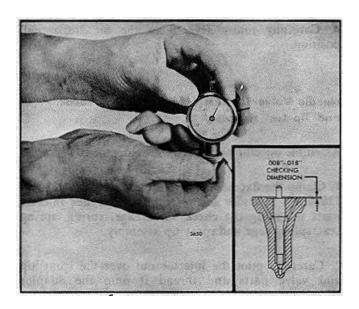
Checking Needle Valve Lift using Tool J 9462-02
